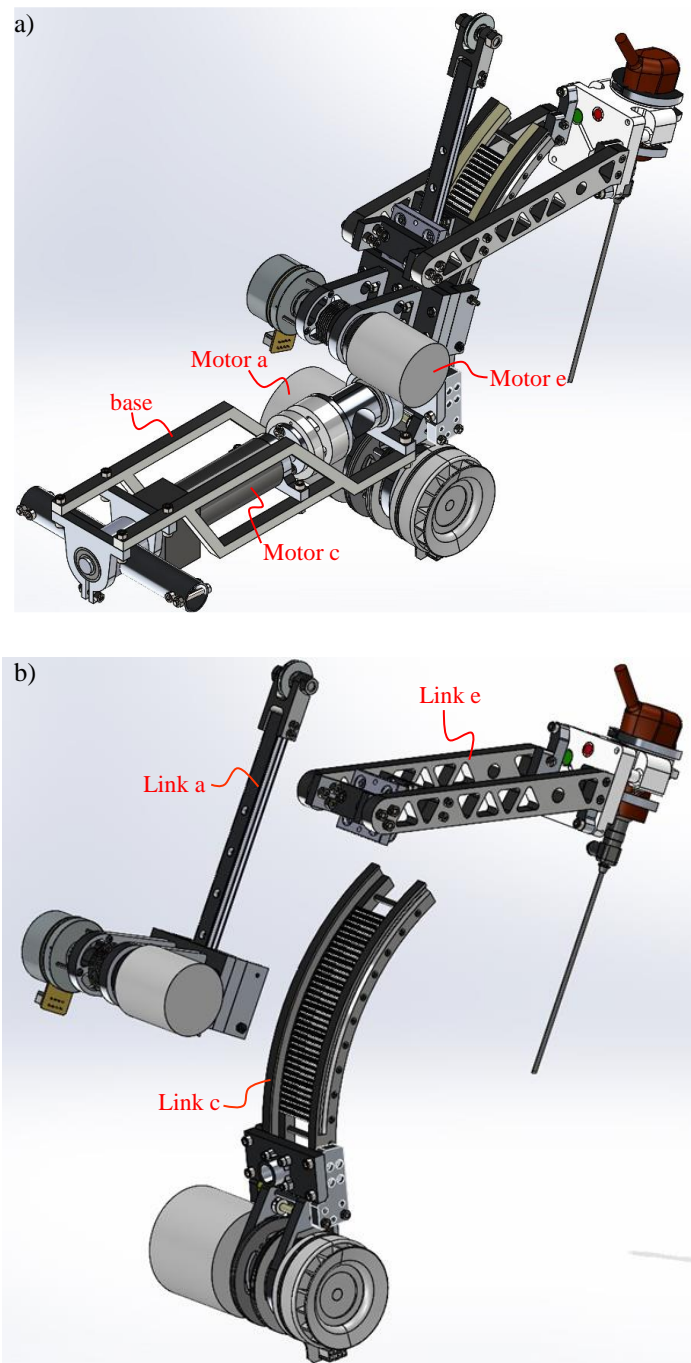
a) The solid model of the RRP manipulator, b) exploded view of the moving links.
